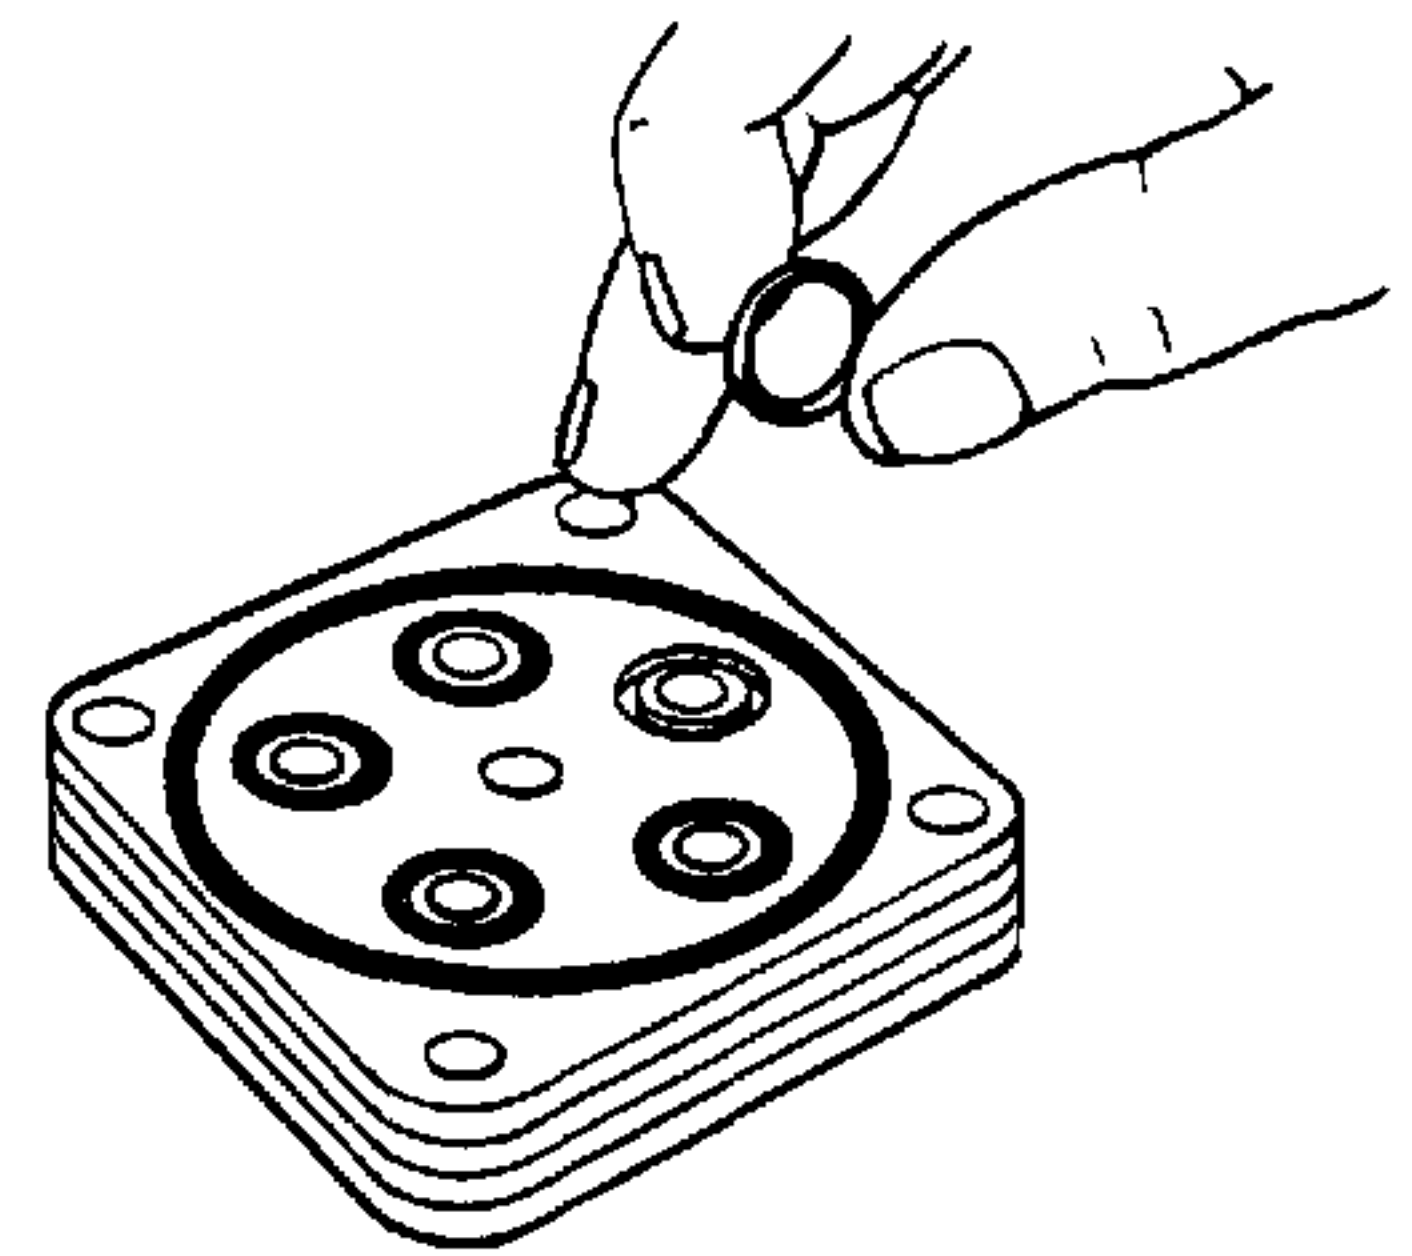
Installing O-Ring and Seal Ring in Power Cylinder Cover.
